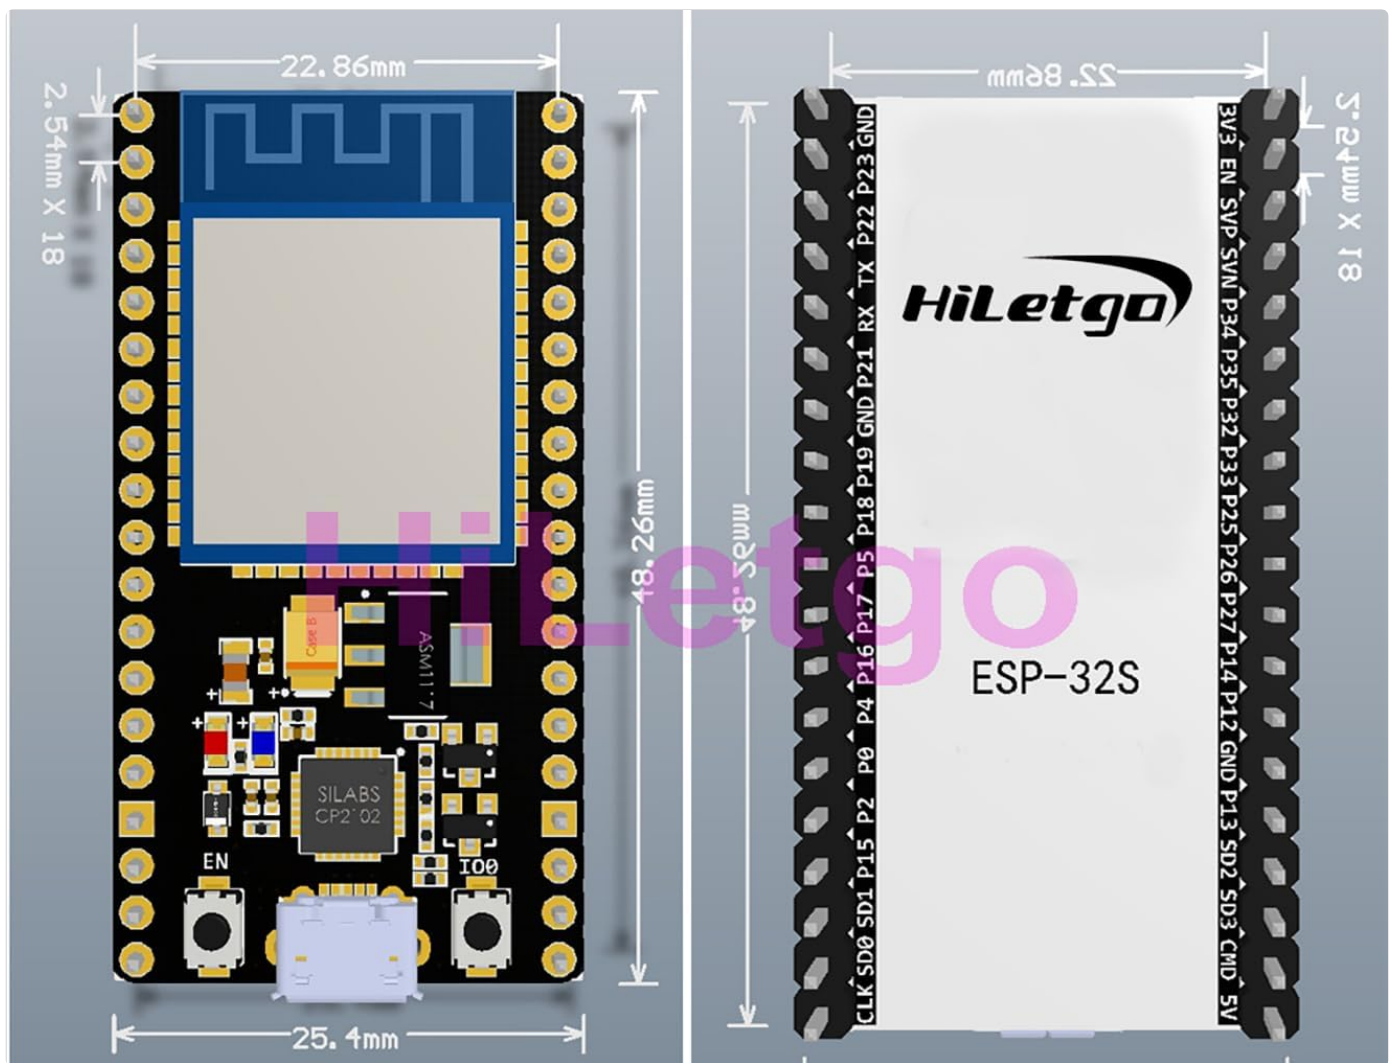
Top view with key dimensions of the ESP32-S Development Board.
